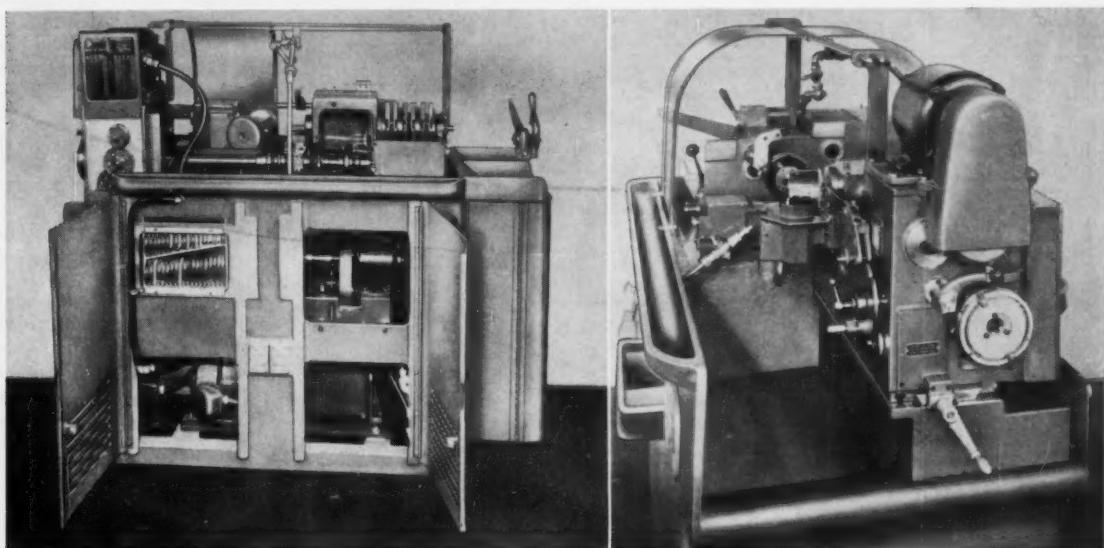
(Left) Open back view of Detroit Screwmatic showing accessibility of cycle time gearing, automatic lubrication unit and coolant pump drive. (Right) View of deep chip well with open end provided on Screwmatic to facilitate removal of chips while machine is in operation
